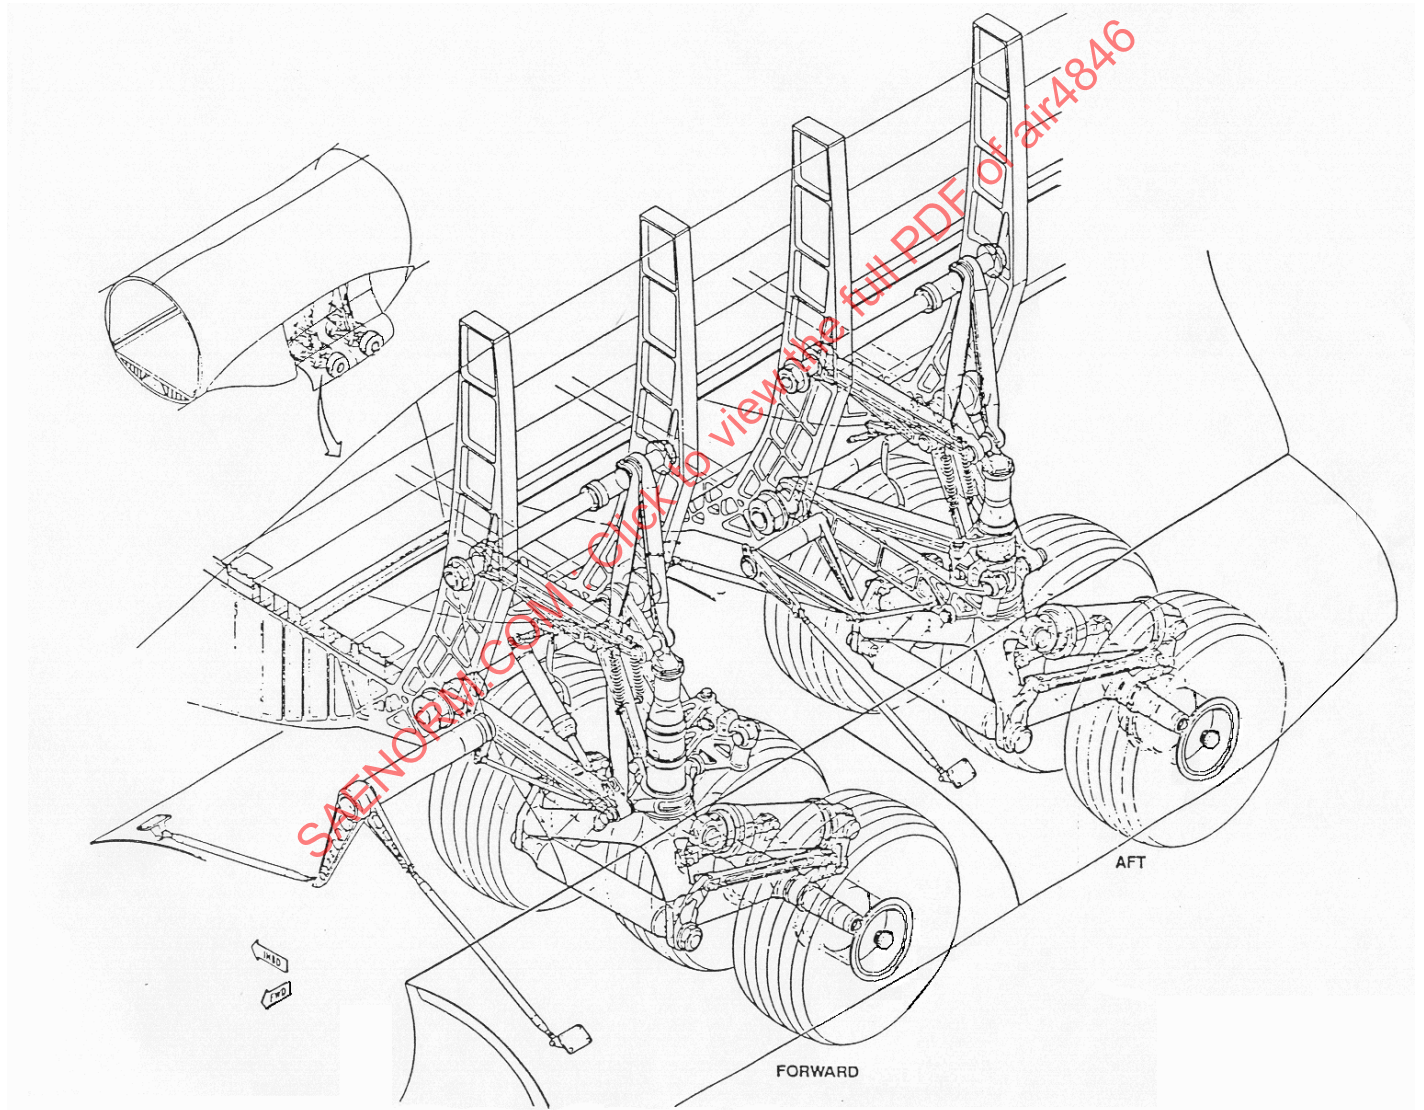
C-17 MAIN LANDING GEAR (LEFT SIDE)
